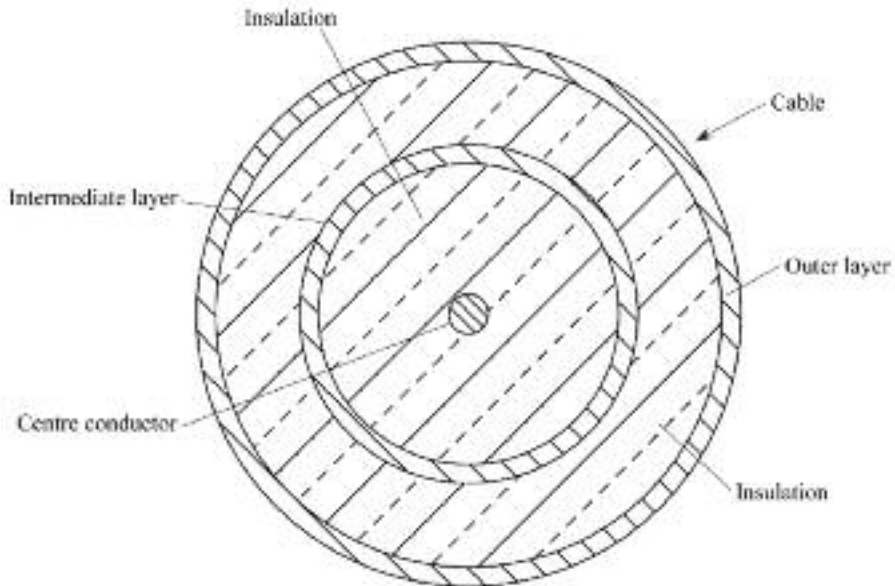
An enlarged cross-section through a tri-axial cable perpendicular to the longitudinal axis through a cable.
